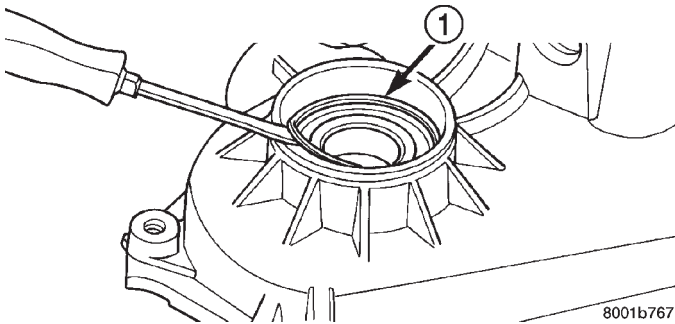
Installing Output Shaft Front Bearing Retaining Ring
